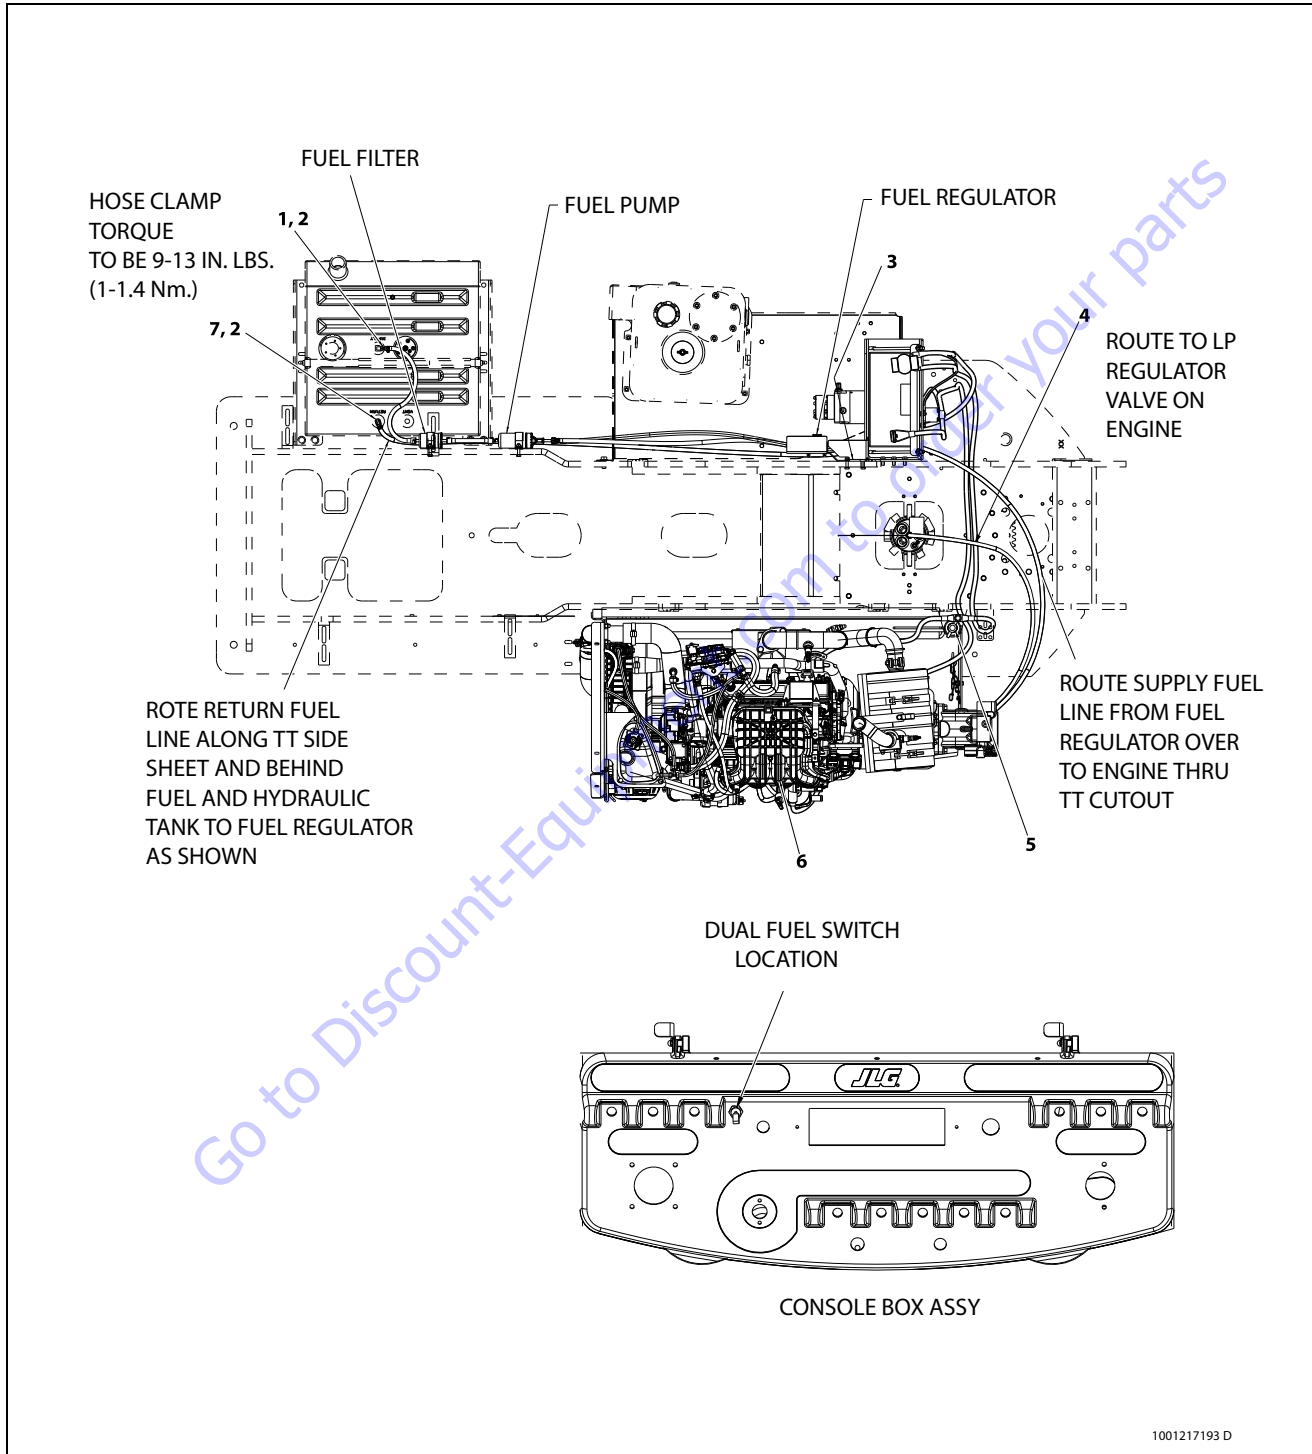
Ford Engine Installation - Sheet 1 of 4
